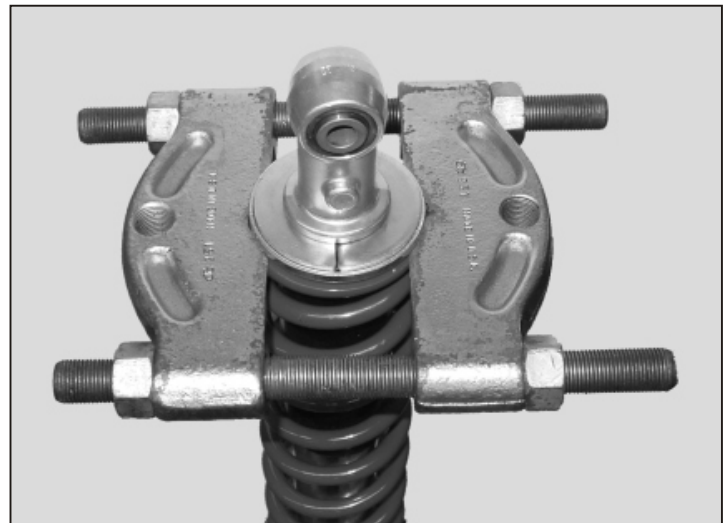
The bearing press should be set in between the spring and the steel retainer. The stock split retainers will be removed by compressing the shock in the press.
